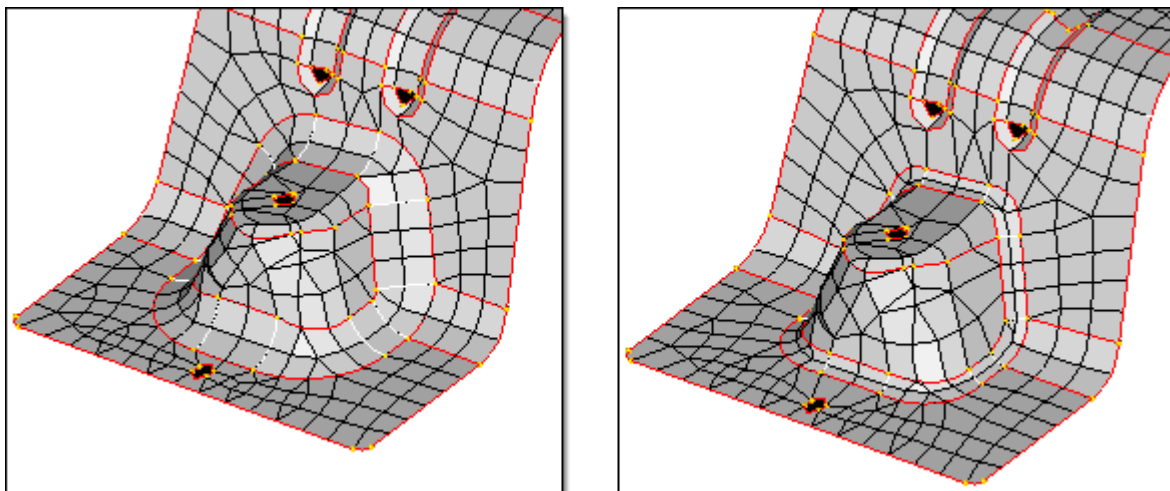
Morph by Altering Dimensions - Radius and Fillet
